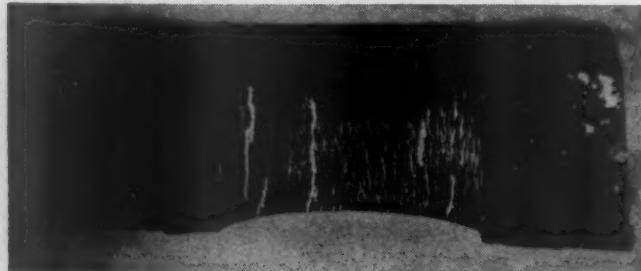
Interior of rivet hole inspected by Zyglo and photographed while illuminated with ultra-violet light, showing the presence in surface of heat tears and tool marks, the failure resulting from fatigue cracks originating in these stress raisers
